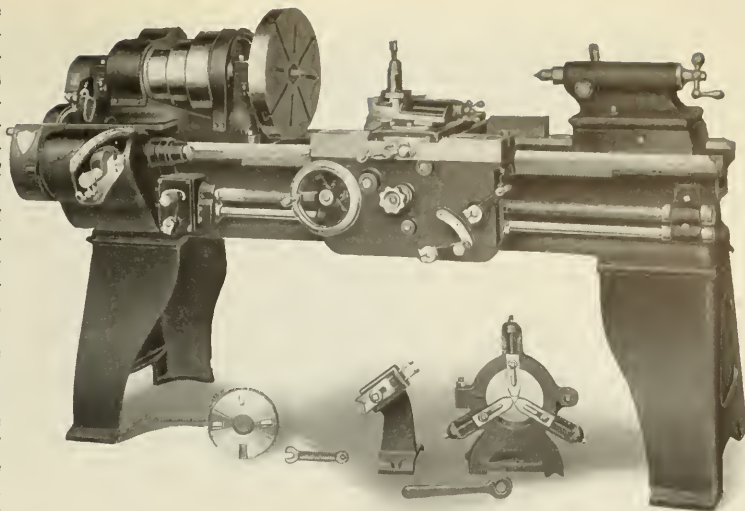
Cone-driven 17-inch Lathe built by National Lathe Co.
